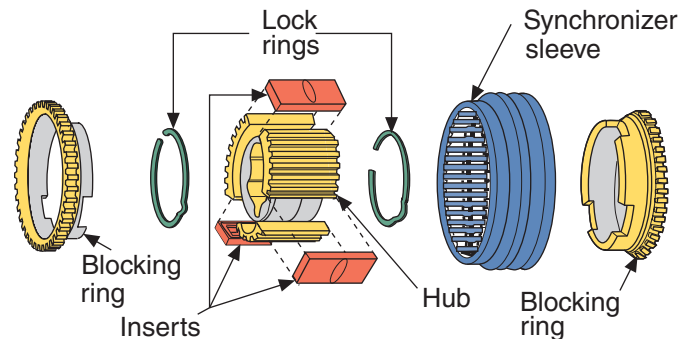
An exploded view of a blocking ring-type synchronizer assembly.
